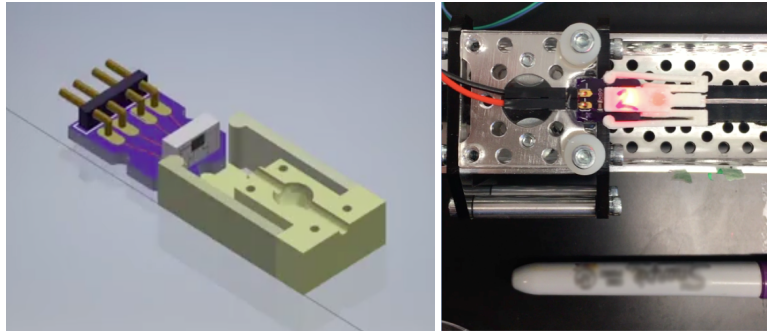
3D printed quick connectors to align stretchable optical fibers with optoelectronic sources and detectors. Left: illustration with photosensor board, right: LED connector in a stretching experiment. Marker at lower right is 1 cm wide for scale.
